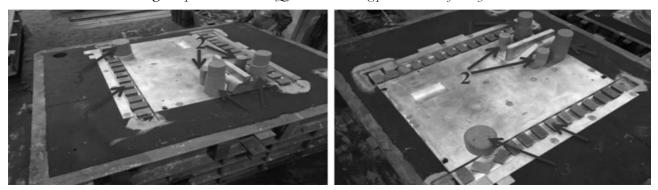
Foundry mould with a model of a moulded spindle after modified technology based on numerical simulation
